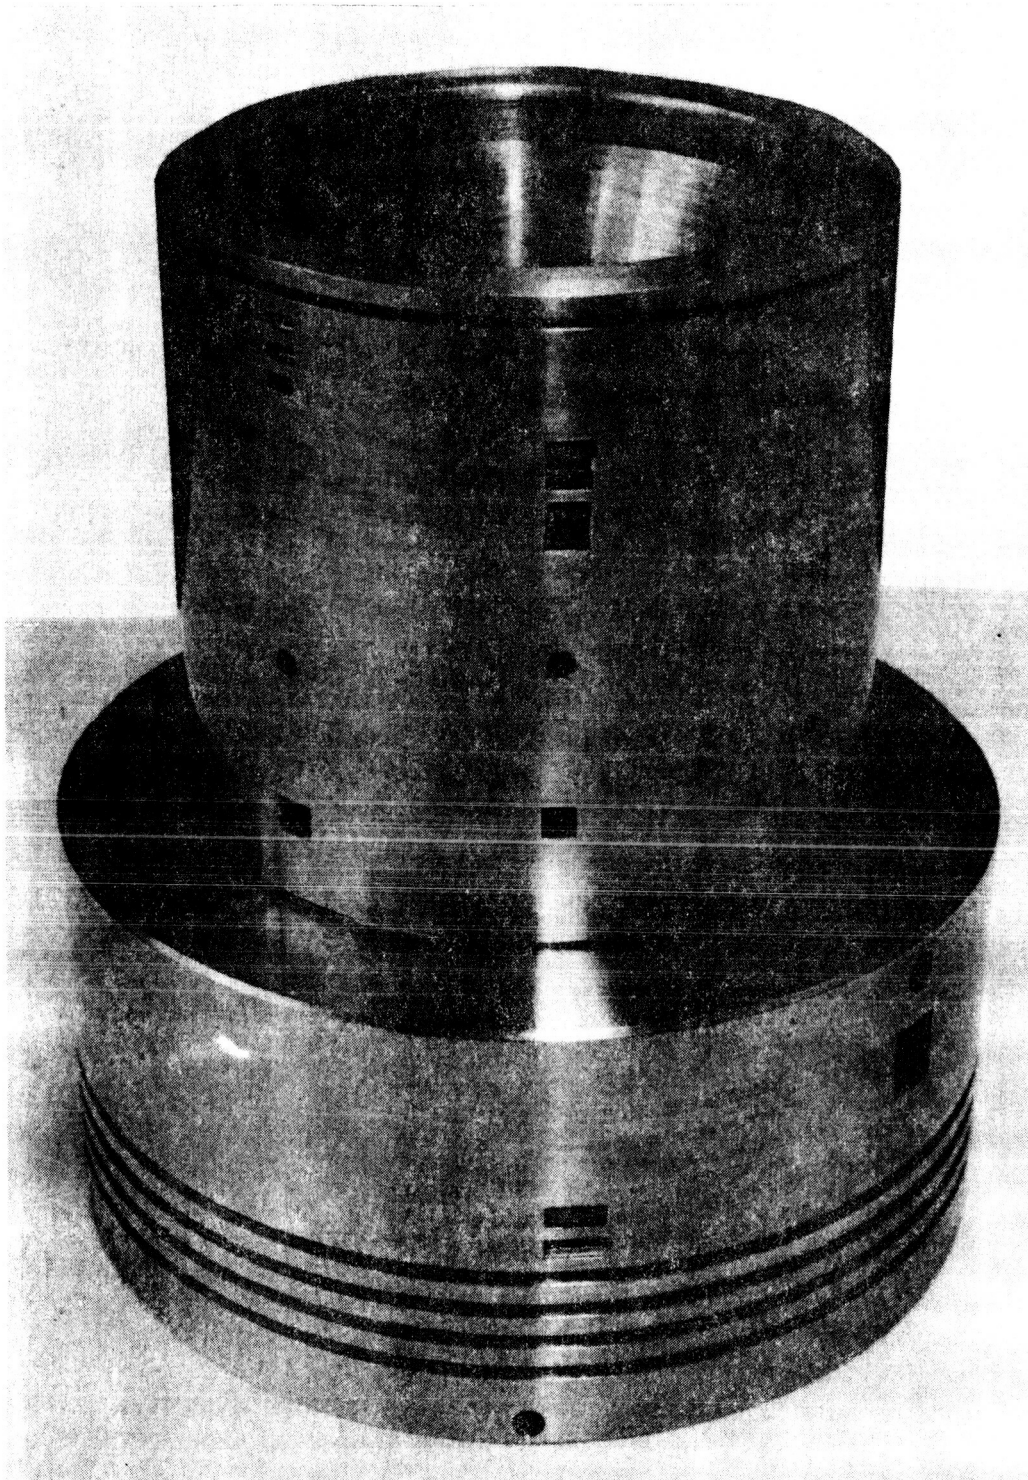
Secondary Chamber Machined for Inserting Into -38 Liner
